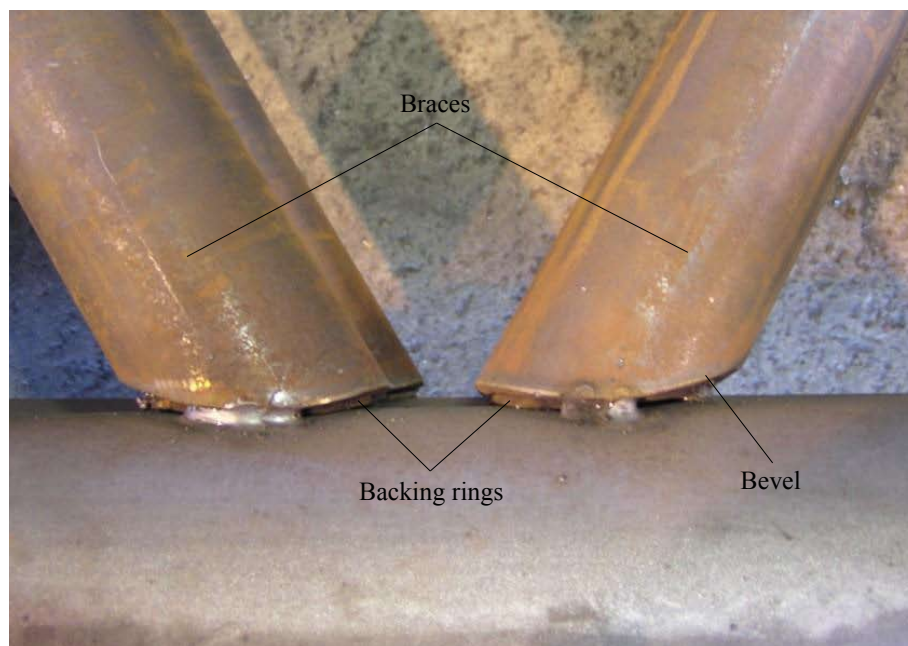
Preparation of joint before welding, backing rings and bevel.
